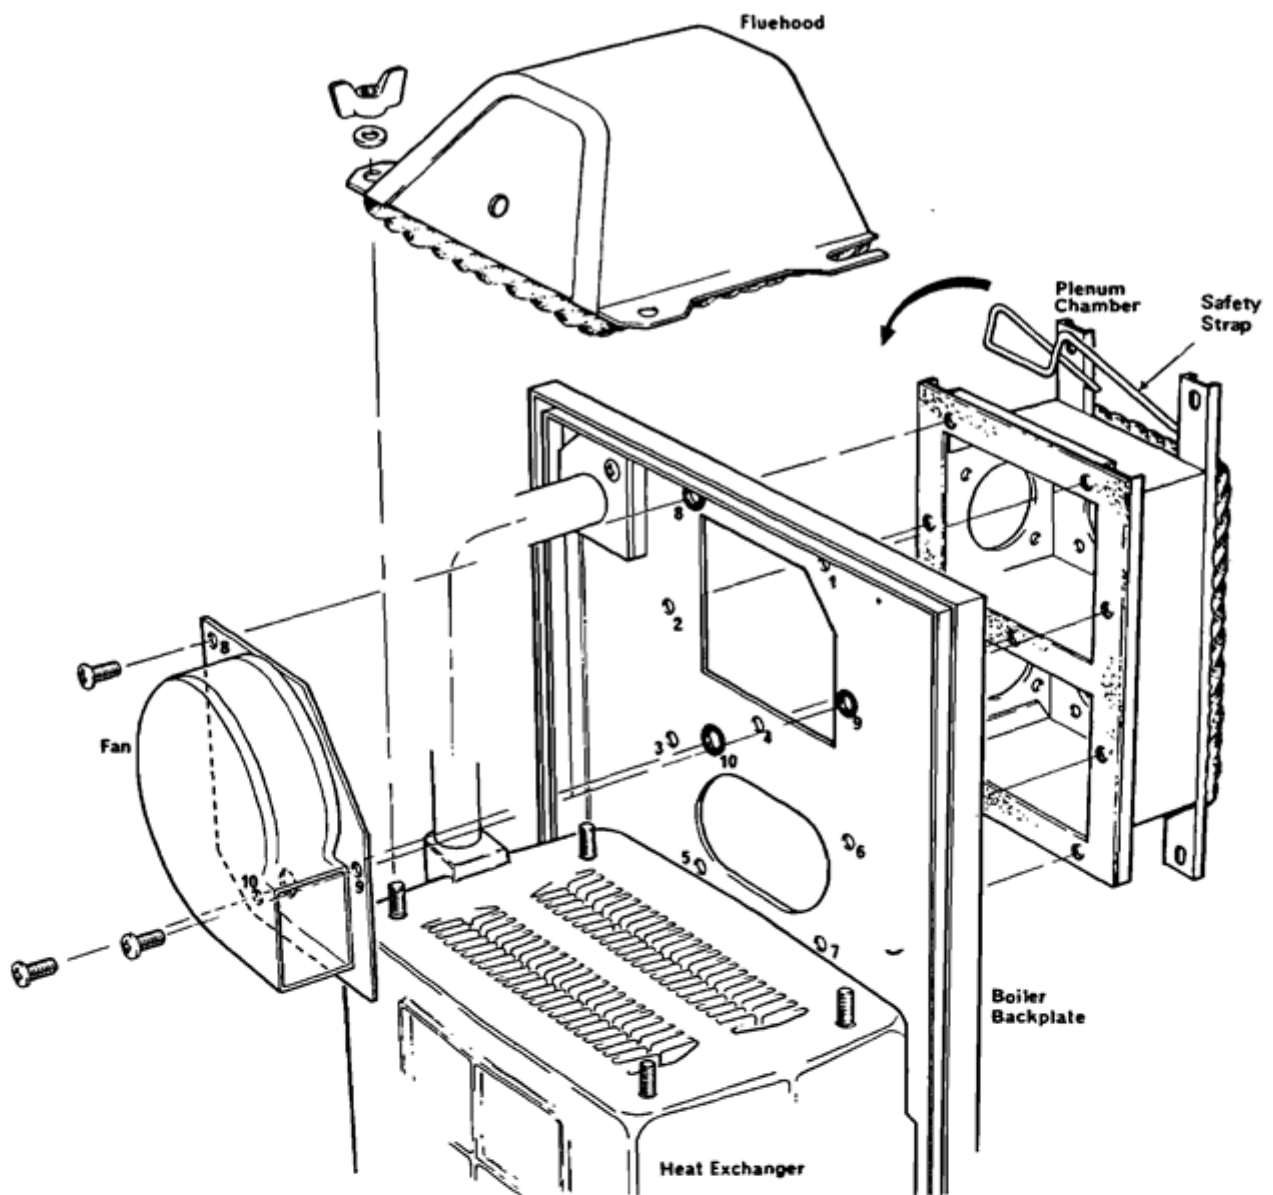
PLENUM CHAMBER, FLUEHOOD AND FAN ATTACHING PARTS
